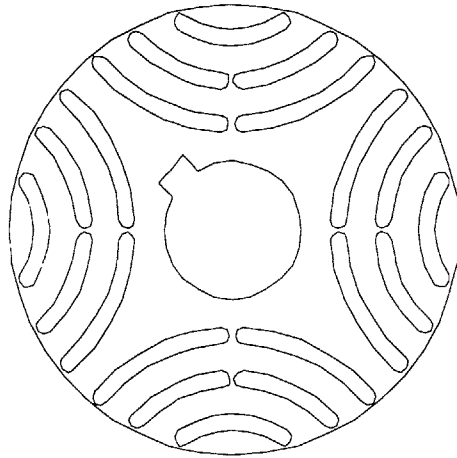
Rotor drawing for three-layer experimental IPM machine.
